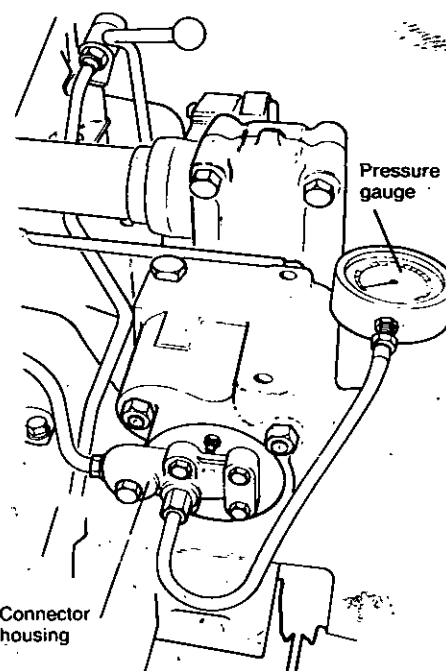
CHECKING PRESSURE AT RAM CYLINDER
